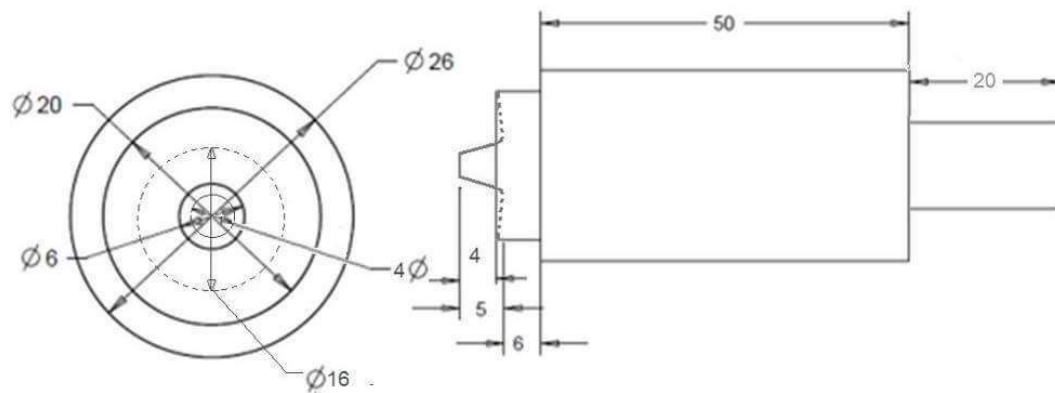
Drawing of FSP tool (Front and Side View)
